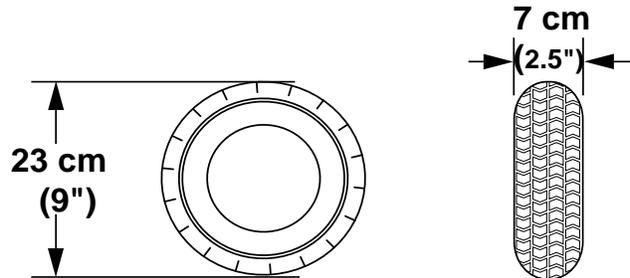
B. RALLY WHEEL DIMENSIONS (REAR)
